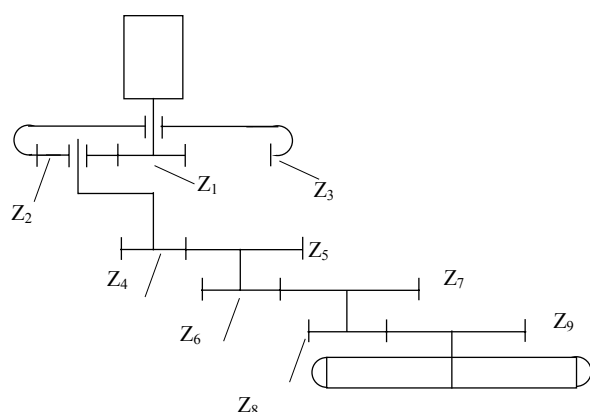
Driving system for bucket wheel with planetary gearbox (gears: z1 – sun, z2 – planet, z3 – standstill rim, z4 – z9 three stage cylindrical gearbox)
